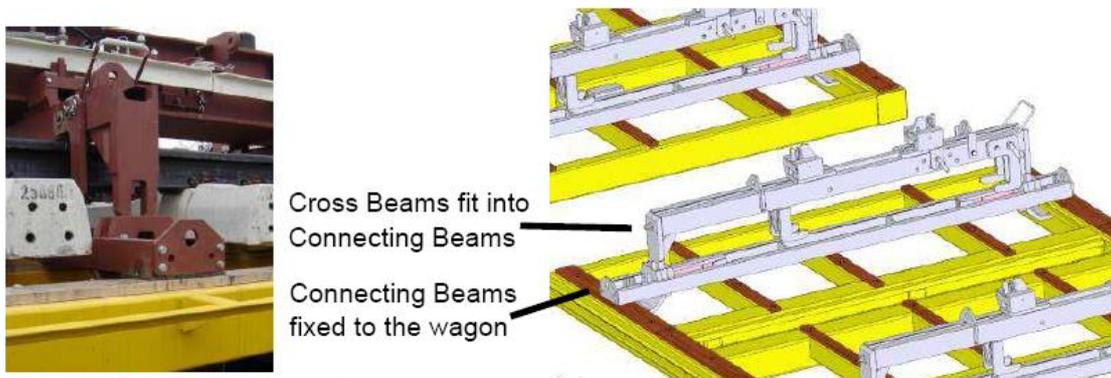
Fixing and handling system developed by NR (source: Kranunion).
